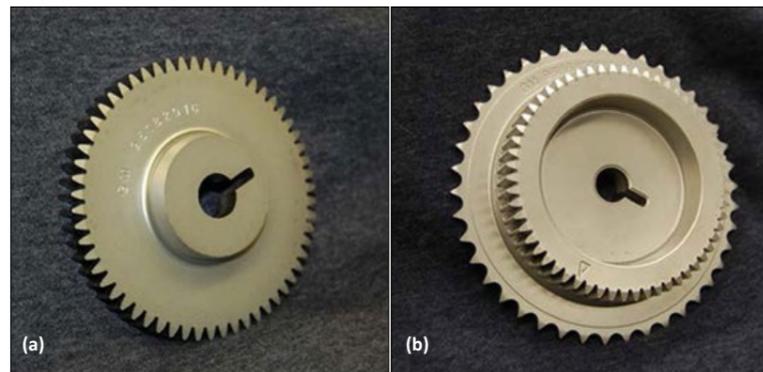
(a) Main running gear, weight ~450 g; (b) "Spro" gear, weight ~1100 g [6]
